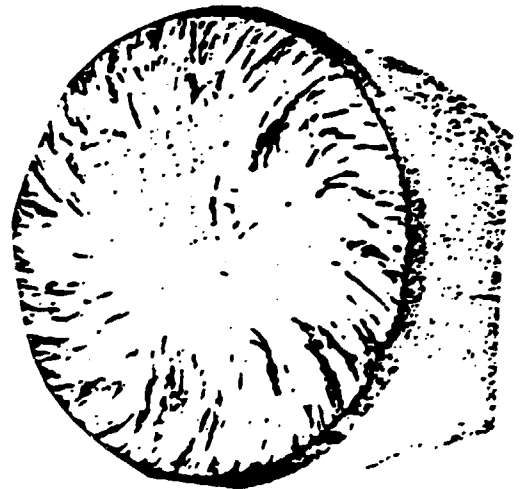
Roller of an axial self-aligning roller bearing of row 293 with strong wear marks at the front due to lubricant shortage.
